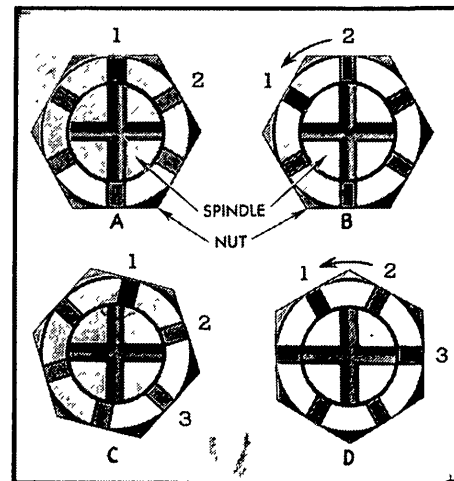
A Method of adjusting front wheel bearings, 1935-52
